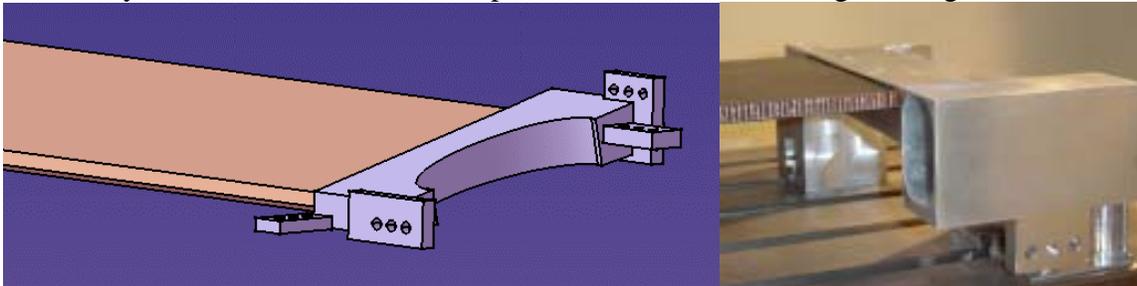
Carbon fiber panel bonded to aluminum end. Figure 3. Hood jig fixture.
